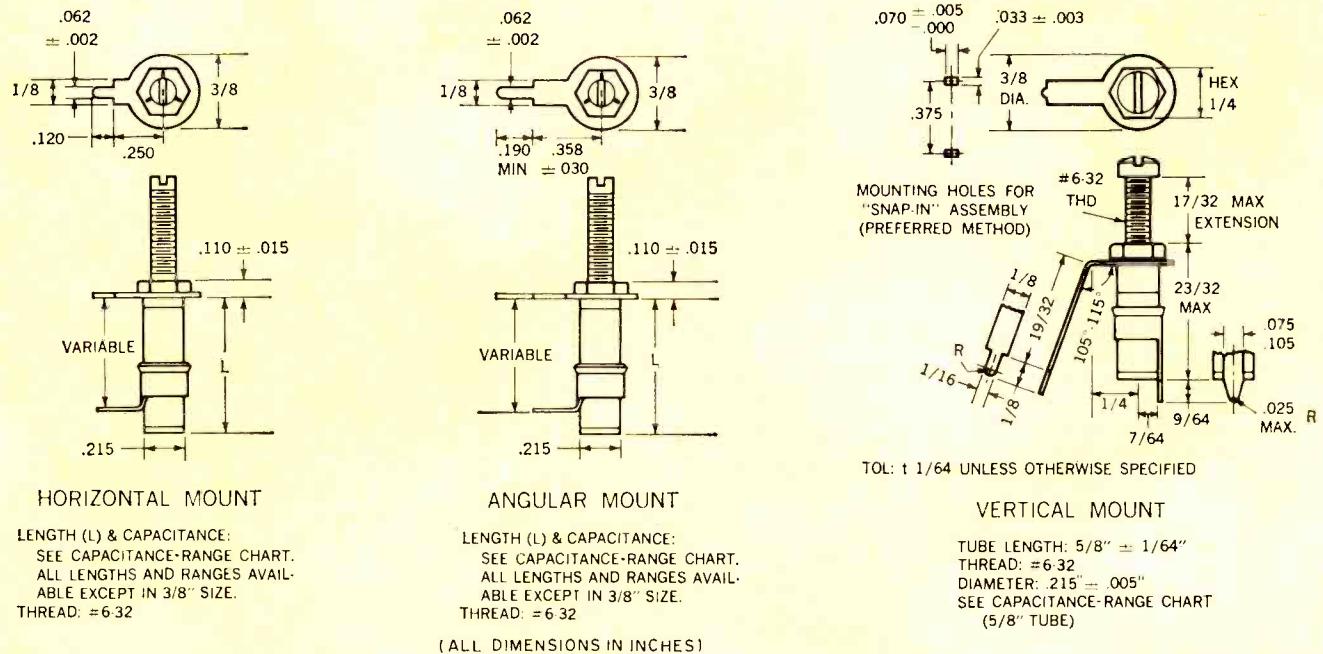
Ceramic tubular trimmers with stamped terminals designed for horizontal, angular, or vertical chassis mounting.
